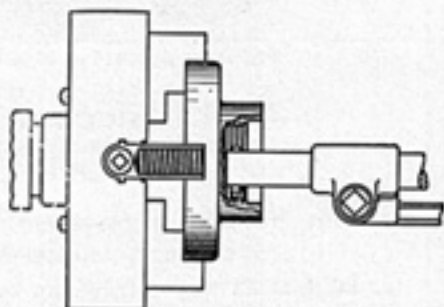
Chuck jaws should be tight when cutting screw threads.
